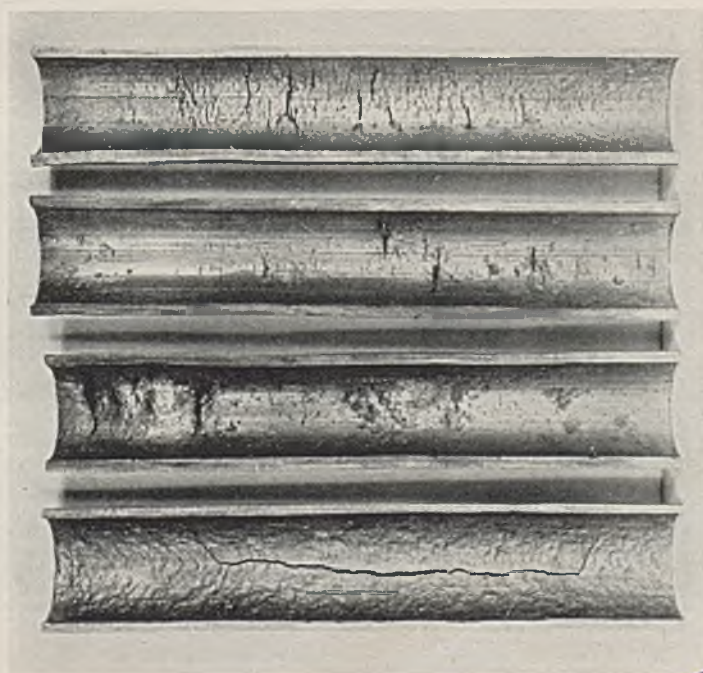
Failure of Superheater Tubes due to Corrosion-Fatigue.
